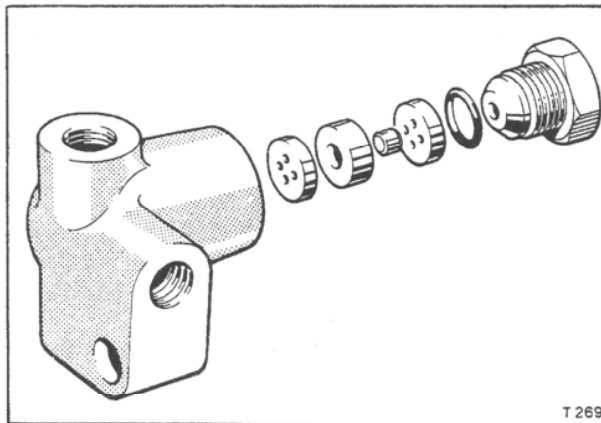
Solenoid restrictor valve (high and low pressure pipe lines)
